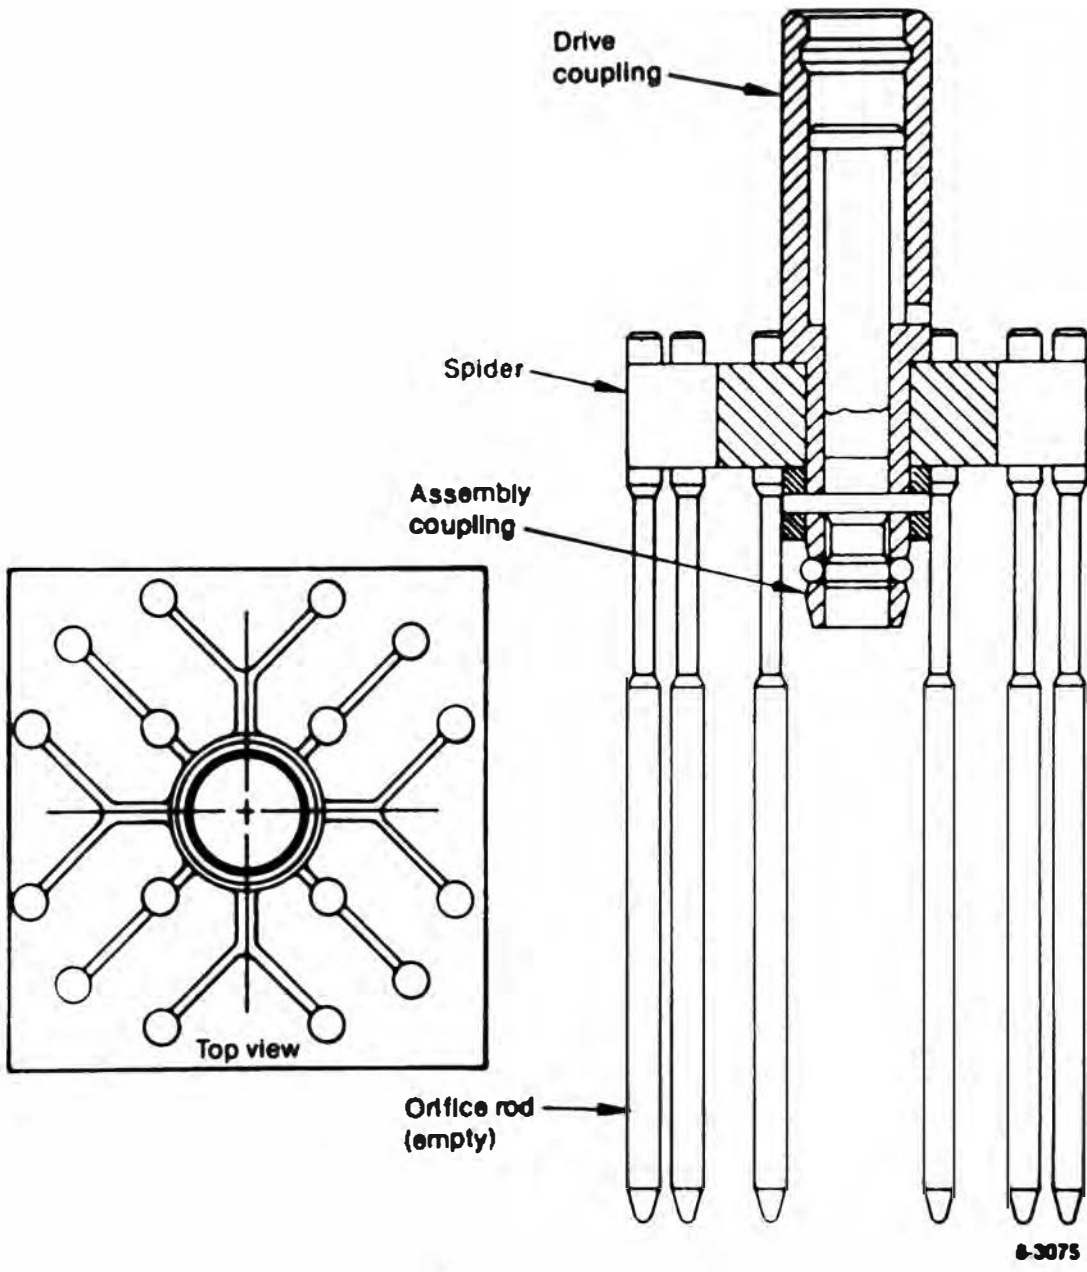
Side, top, and cross-sectional views of TMJ-2 fuel assembly.
